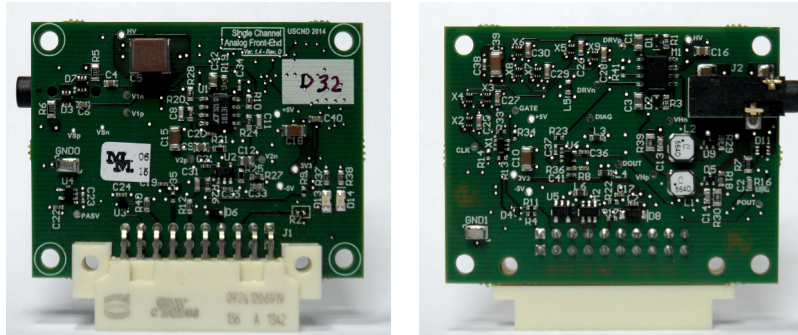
Pictures (front and rear) of the analog front-end card developed for the prototype SHM system. Board size is 53×40 mm.
